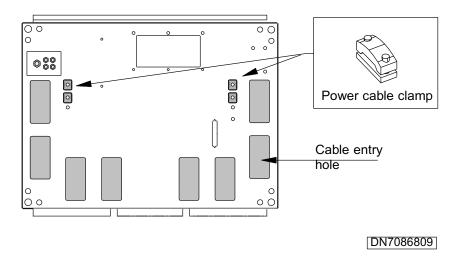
Cable entry holes and cable clamps in Flexi Cabinet for Indoor, FCIA (top view)
